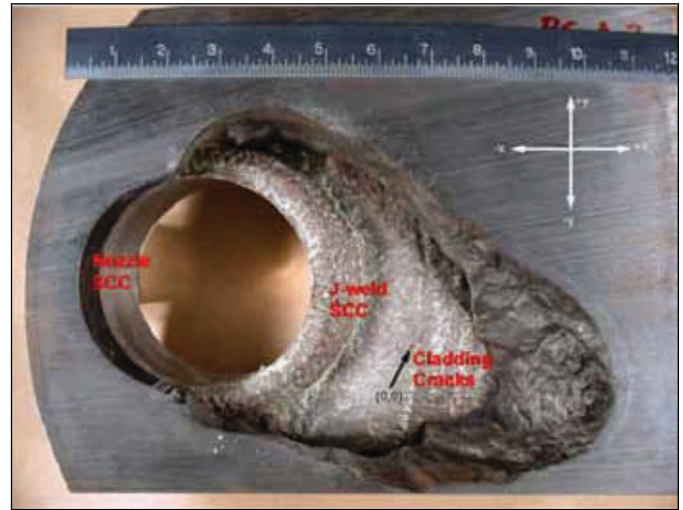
Photograph showing extensive boric acid corrosion in the low-alloy steel Davis-Besse reactor pressure vessel head. Reactor coolant leaked from PWSCC cracks in the Alloy 600 control rod drive mechanism nozzle and the nozzle J-groove weld.
